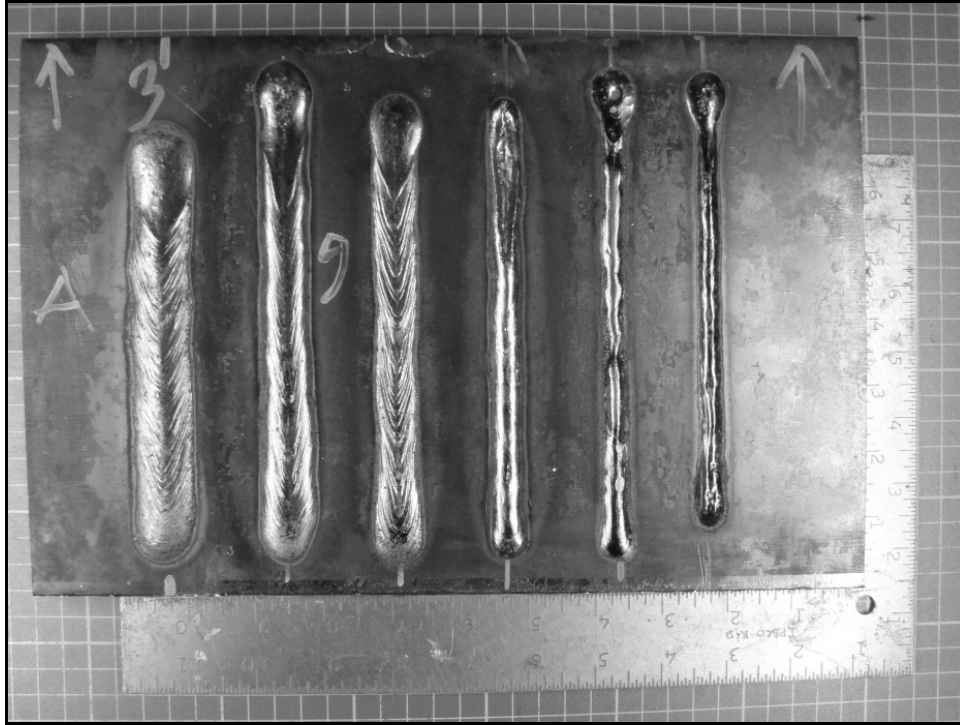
Typical Weld Coupon Displaying Six Bead-on-Plate Welds
